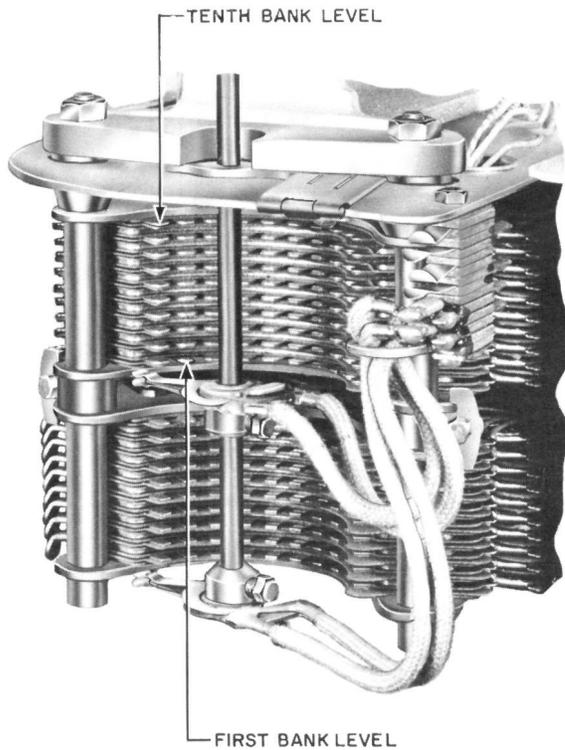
Step-by-Step Switch Bank Assembly and Mounting
